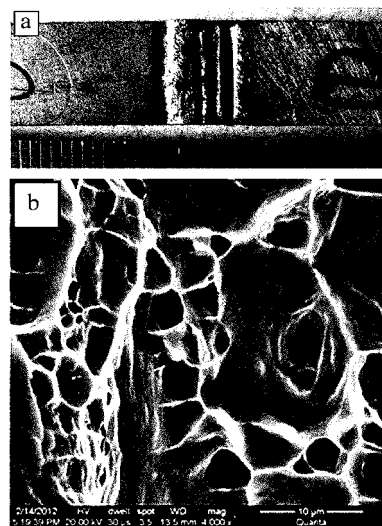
Tensile specimen fractured at heat affected zone of aluminum alloy
